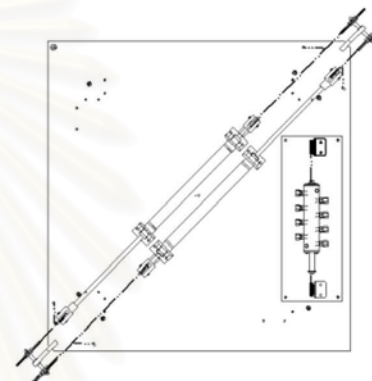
Bottom view displayed two double rod cylinders and CMP valve
